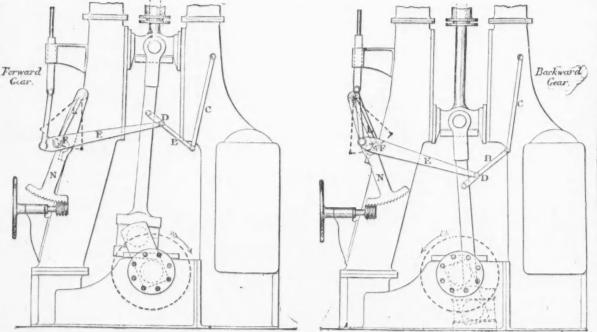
Example of the Joy Valve Gear Applied to a Marine Engine Employing a Radius Rod instead of Slide and Slideway.
